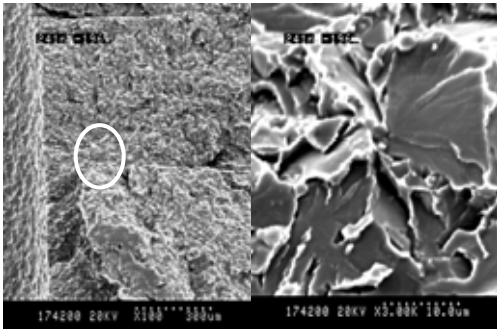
Typical fracture surface showing IC type of cleavage initiation site
